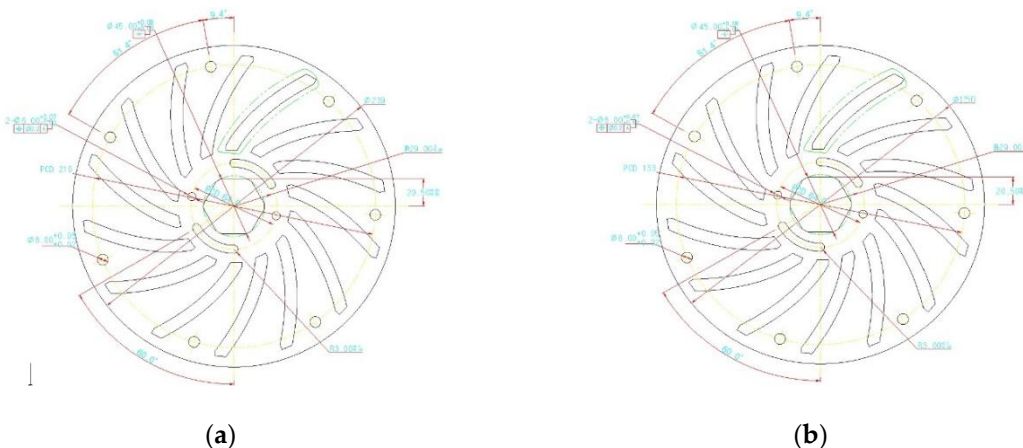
(a) Design of centrifugal belt pulley CVT drive plate; (b) Design of centrifugal belt pulley CVT driven plate.
